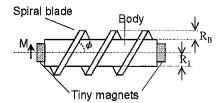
Schematic view of spiral-type magnetic micro-machine.
